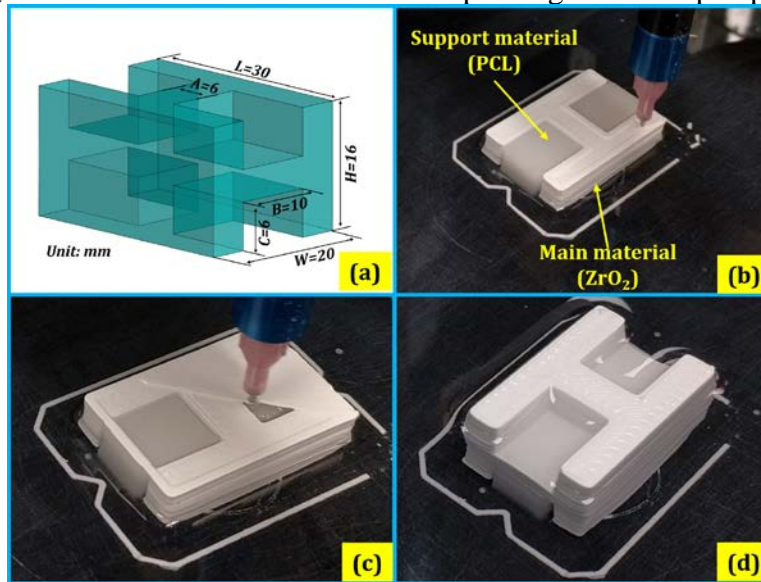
H-shaped part fabricated with using PCL as the support material: (a) CAD model, (b) & (c) Part being printed, (d) Part printed completely.
